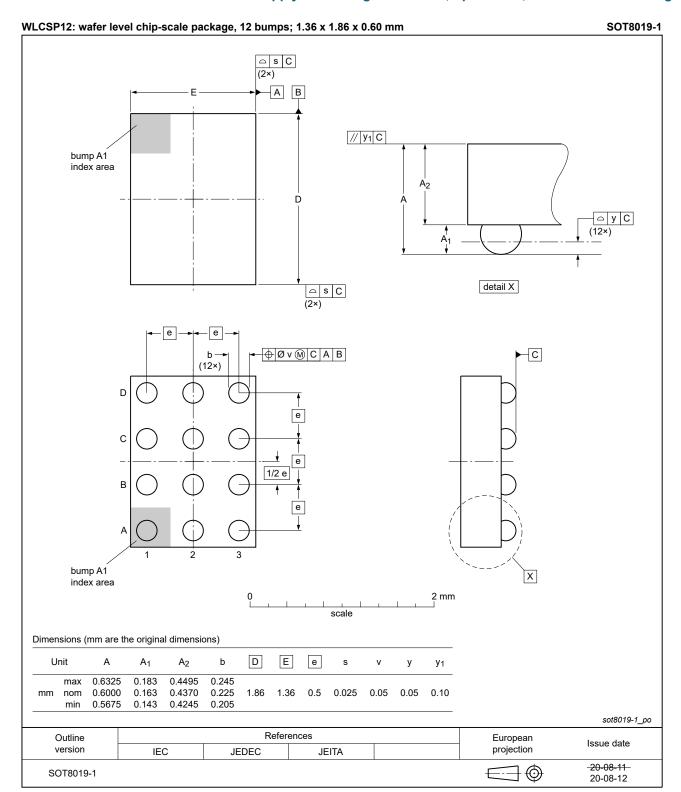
Package outline SOT8019-1 (WLCSP12)
